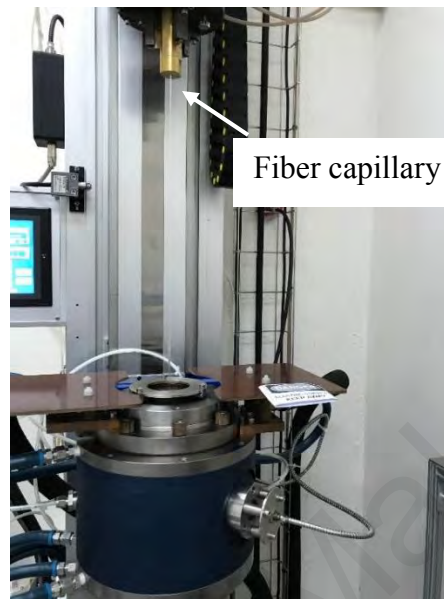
Drawing of the fiber capillary for second stage drawing.
